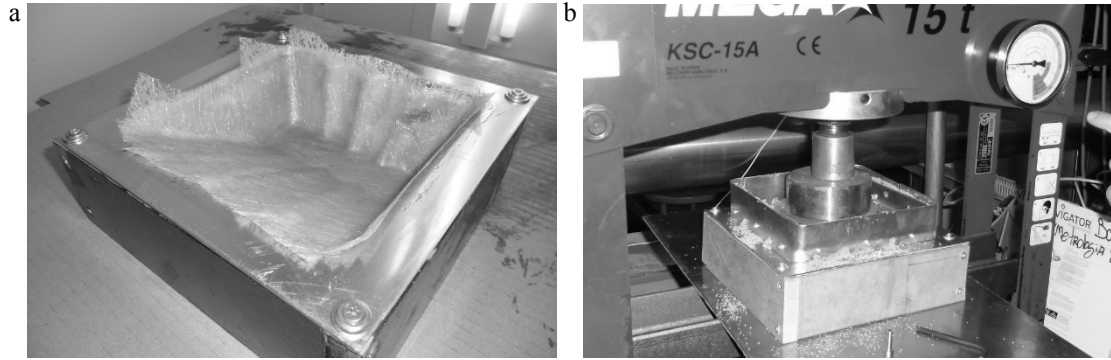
Thermoset manufacturing processes with rapid sheet metal tools: (a) hand lay-up; (b) cork compression moulding.
